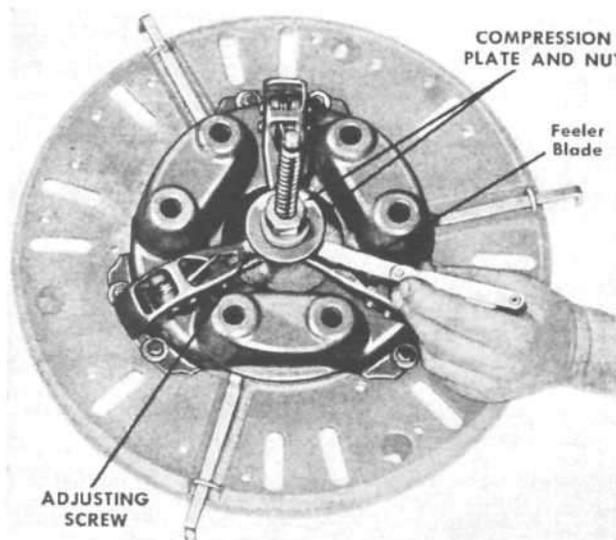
ADJUSTING LEVERS ON ROCKFORD CLUTCH
